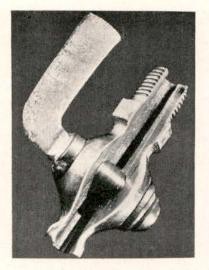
Plug-type petcock showing plug valve. Because the plug must be kept tight to prevent leaks, this valve is hard to open and close.
